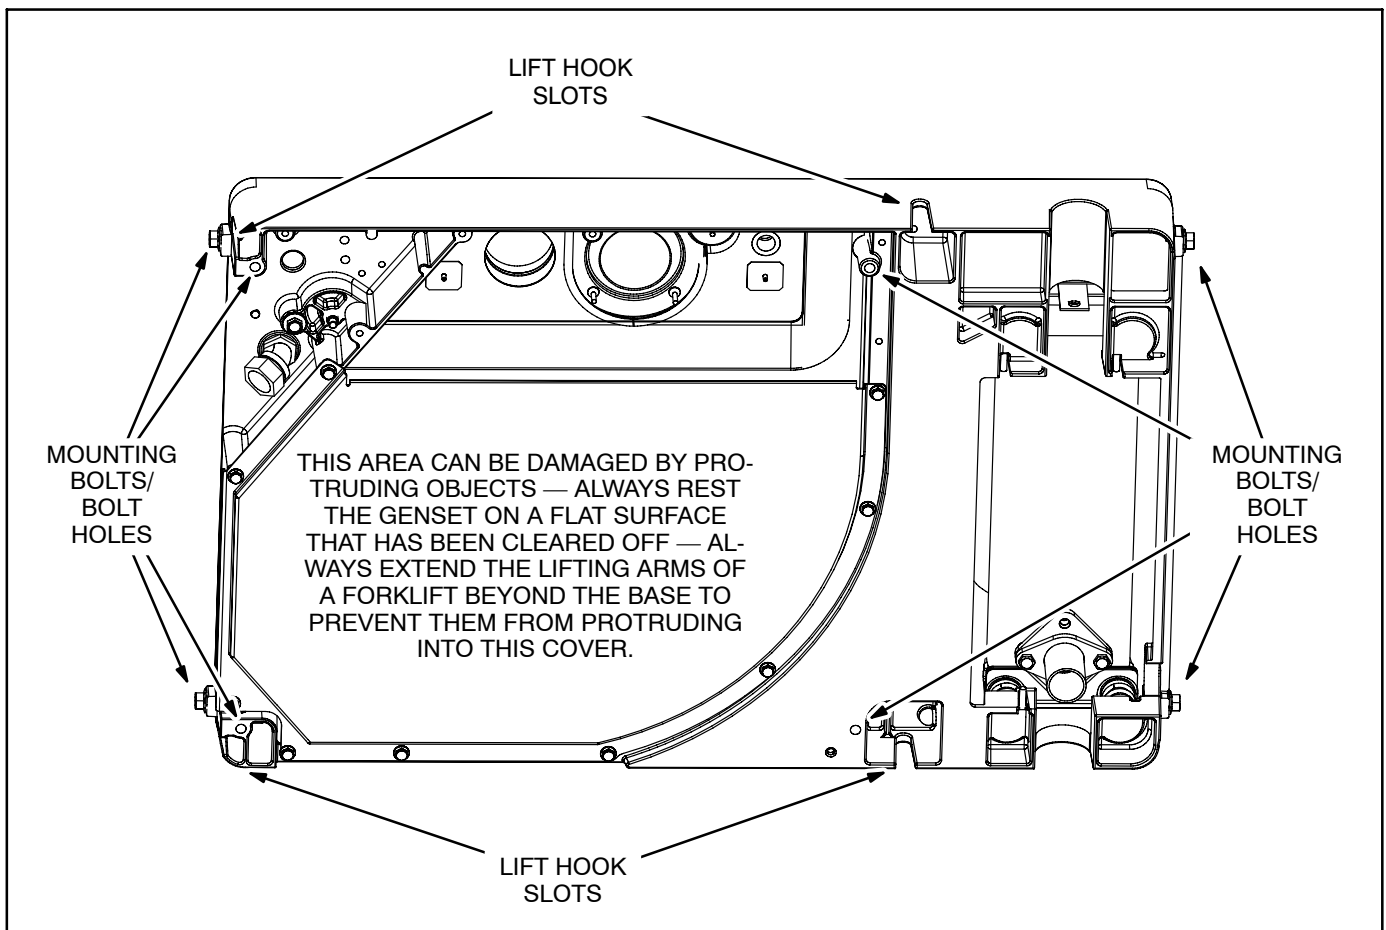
GENSET LIFT-HOOK SLOTS—MOUNTING BOLT HOLES—AREA THAT CAN BE DAMAGED
